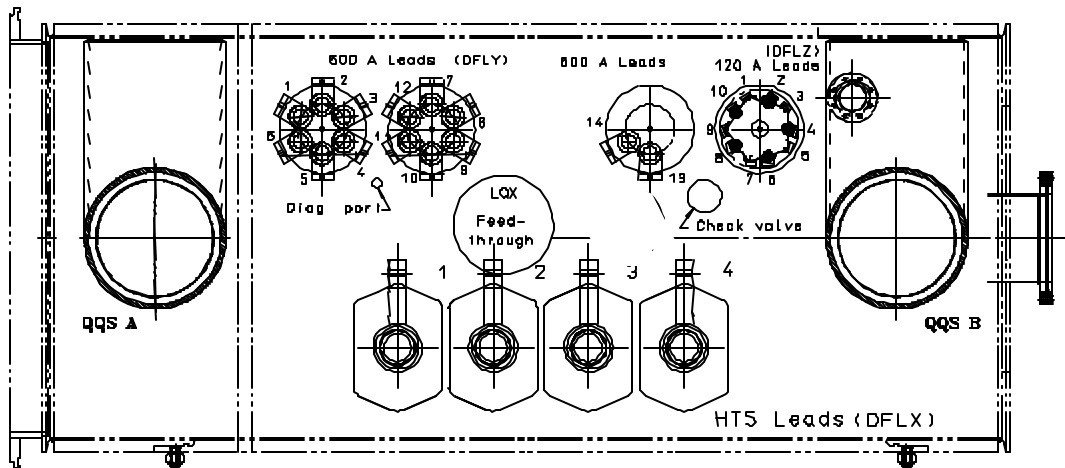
Location of LQX feedthrough assembly for DFBXB and DFBXF. The assembly is located at $y = +1150$.
